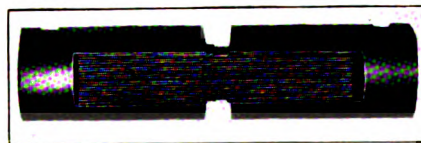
FLEXIBLE PIN UNITS ASSEMBLED
